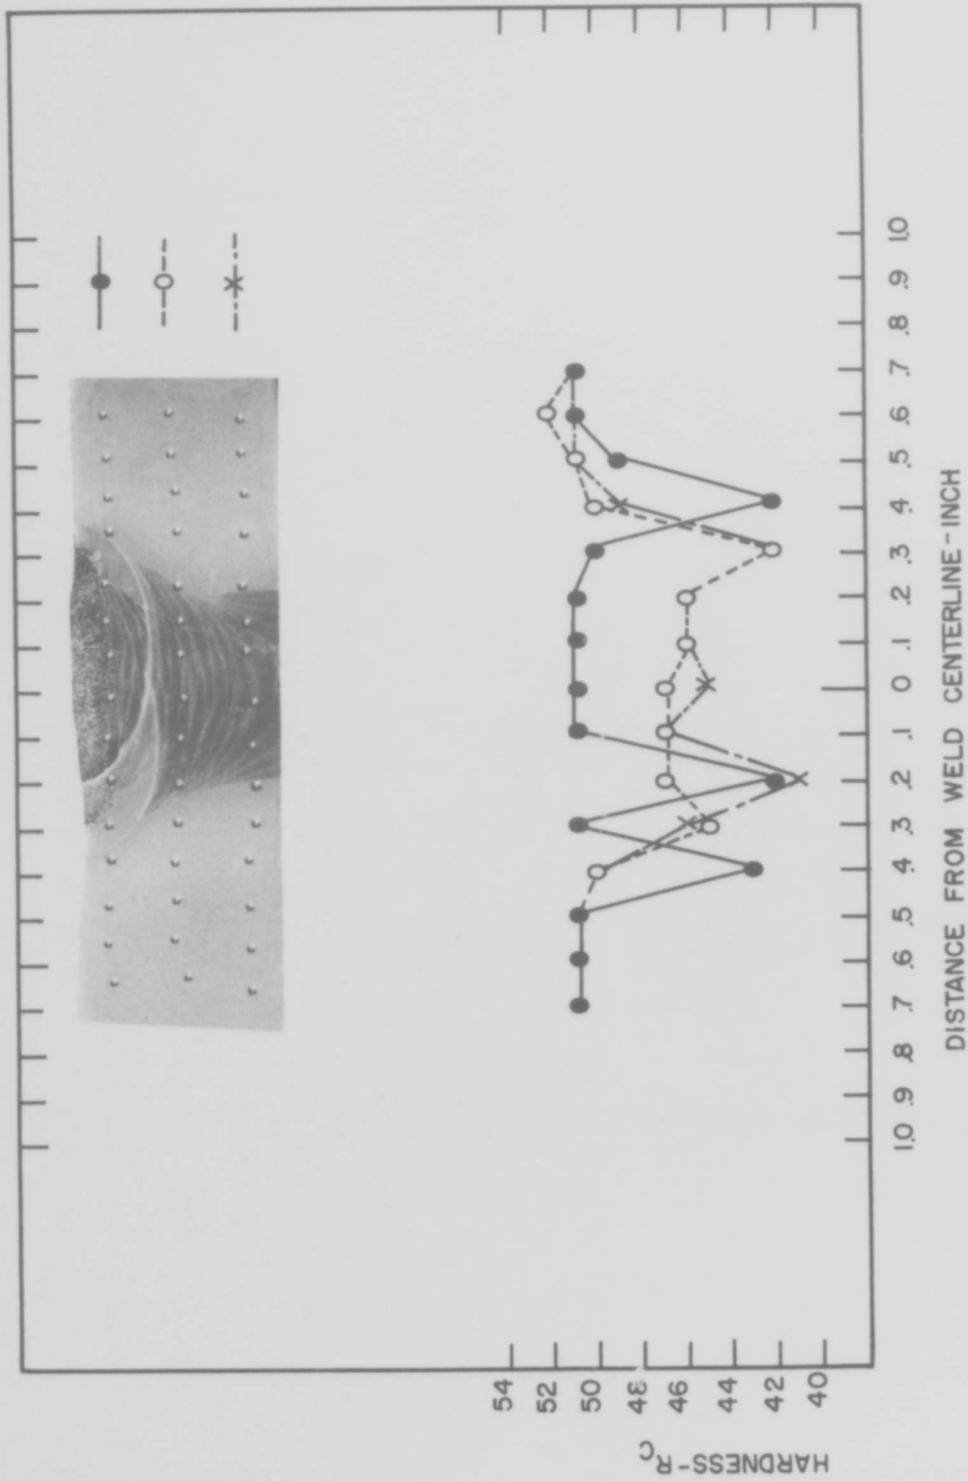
Hardness Survey of TIG Weld No. A239 Made in AMS 6435 Plate Material Tempered at 550°F at a Welding Speed of 10 ipm Using Filler Wire No. 1.
